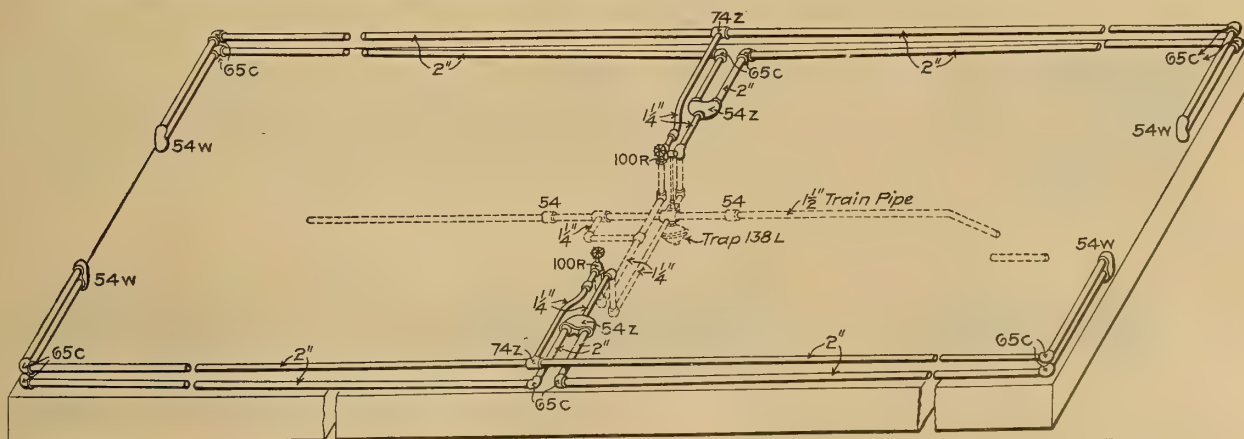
PLAN OF PIPING, DIRECT STEAM SYSTEM C, SHOWING 3-PIPE SYSTEM WITH TWO TRAPS. No. 138 L.
